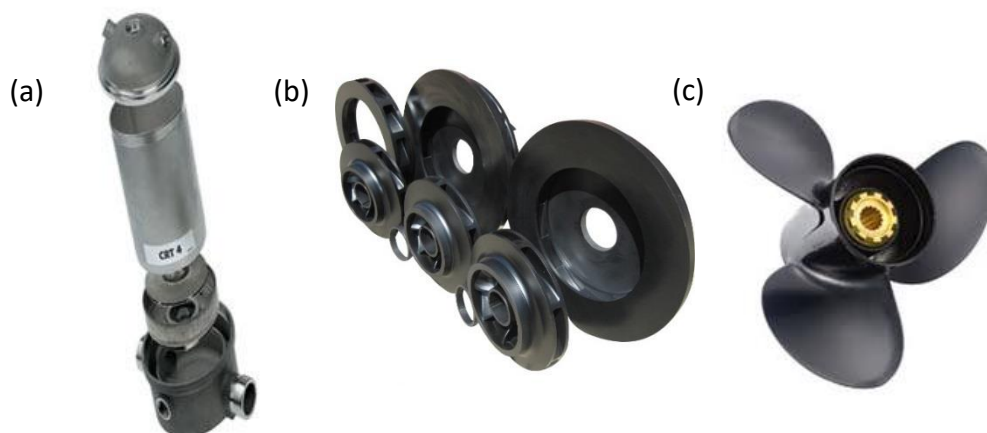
Examples for possible applications that can be AM (e.g. pump, impeller and propeller); (a) Shows a pump used for sea water applications, (b) shows the impeller component in a pump [125], (c) shows a propeller [126].
